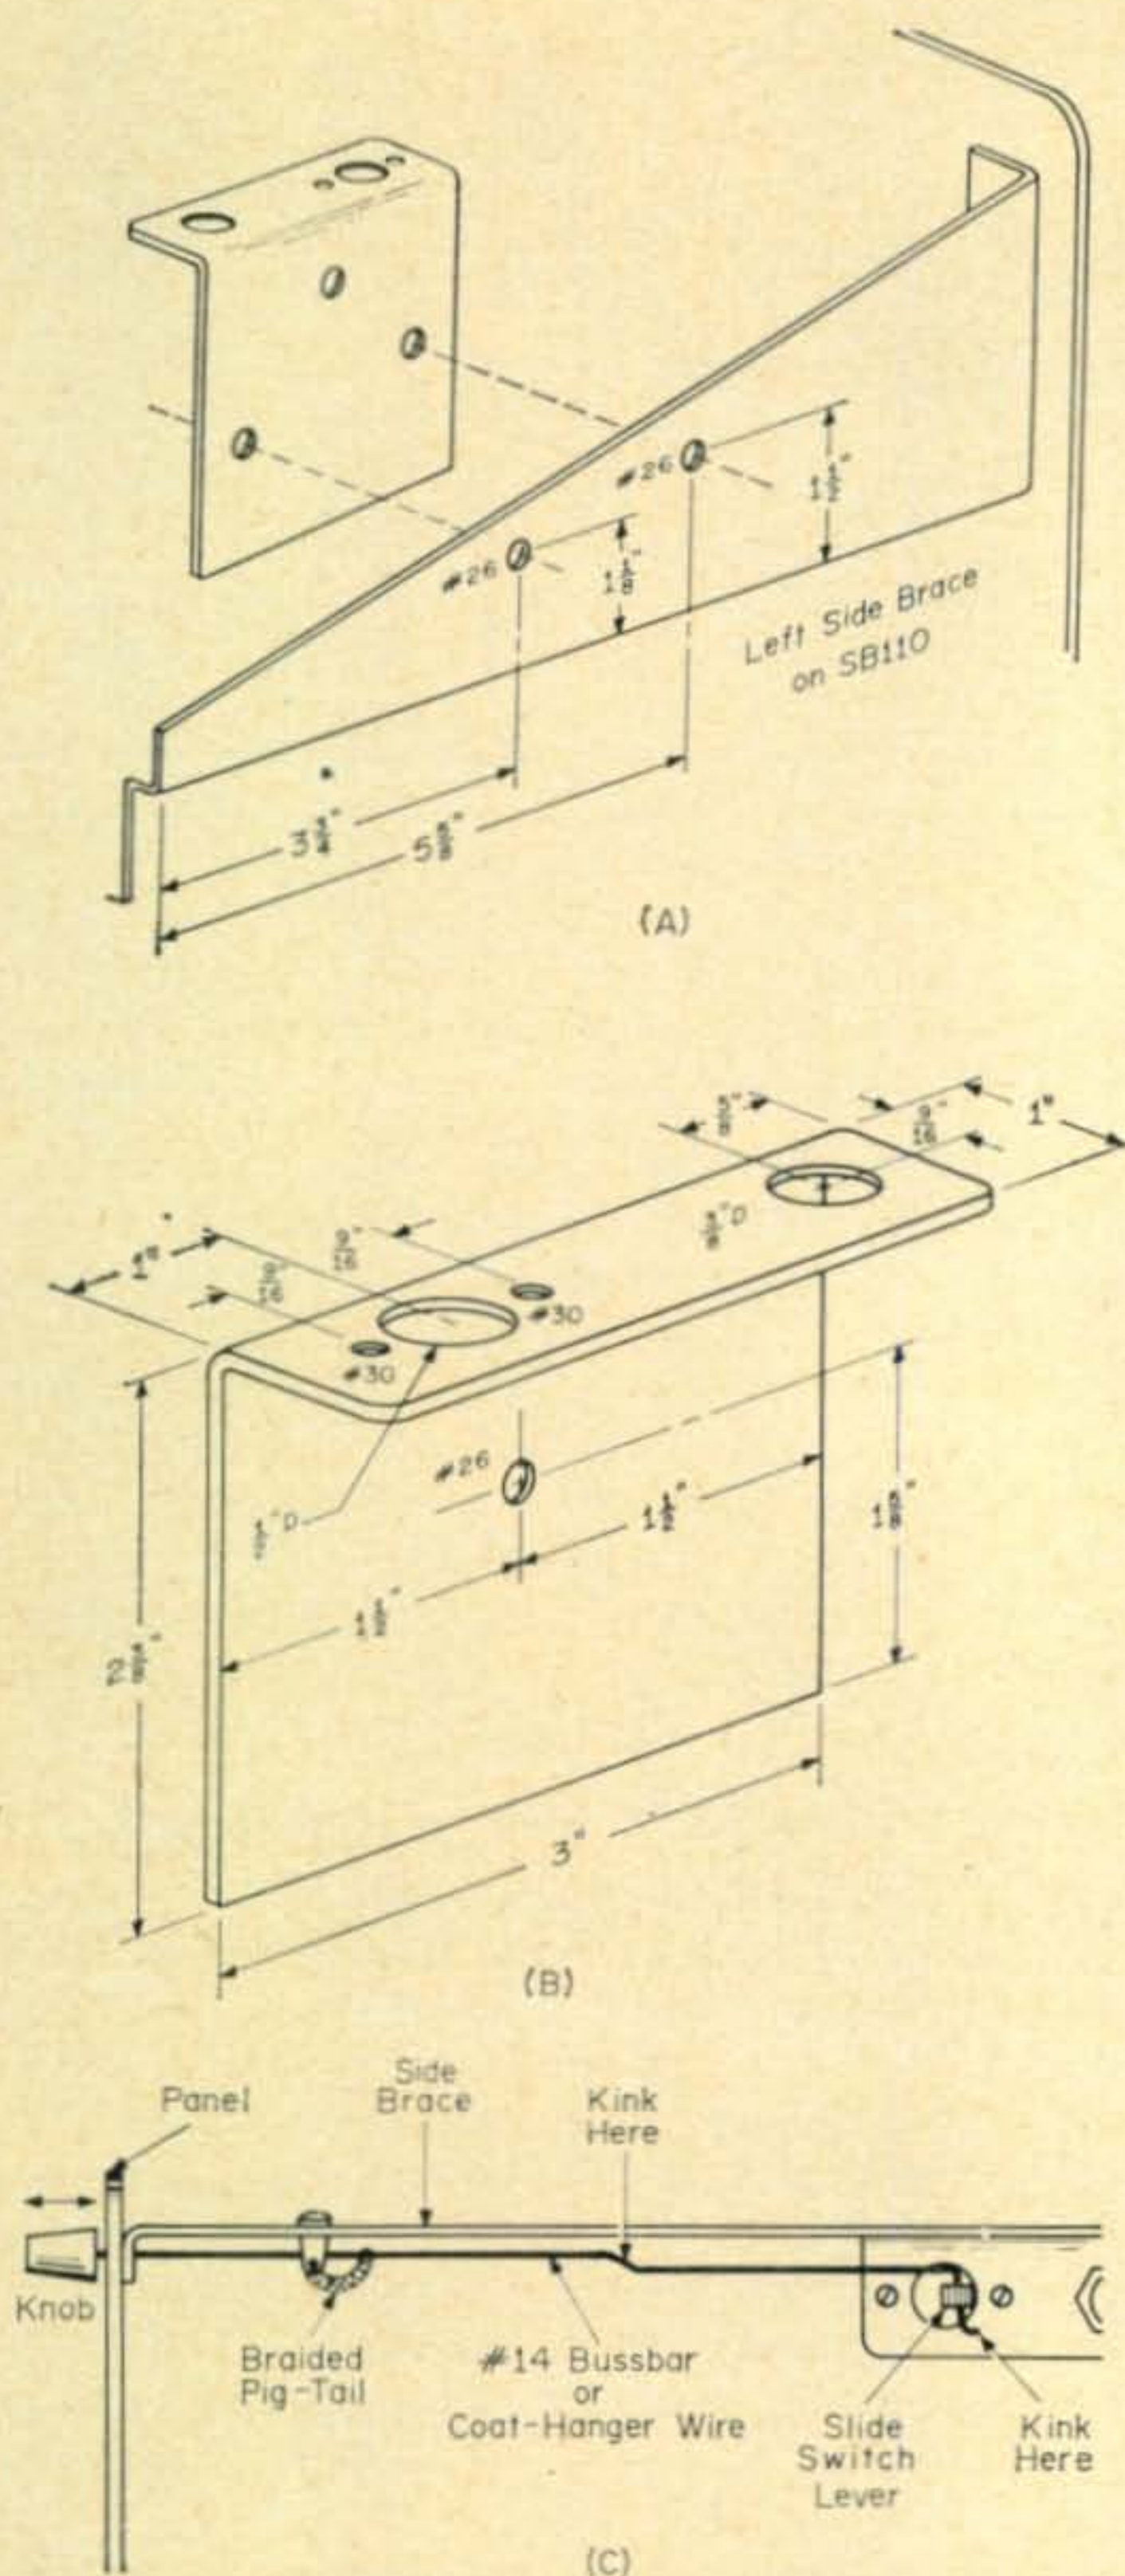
(A)—Dimensions for holes to be drilled in left side brace of the SB-110. Also drill a hole 1 7/8" from the panel and 3" from the bottom of the side brace (for step 30). (B)—Dimensions for bending and drilling bracket to be mounted on side brace as shown at (A). (C)—Method of linking the switch lever with bussbar.
